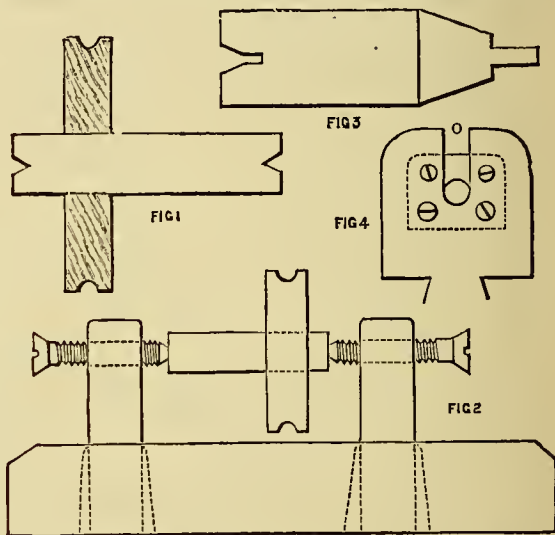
BAR, CENTRED, WITH WOOD PULLEY. FIG. 2.—BLOCK AND STANDARDS FOR TURNING BAR. FIG. 3.—MANDREL TURNED AND TAPERED. FIG. 4.—HEAD CUT TO RECEIVE BAR.
